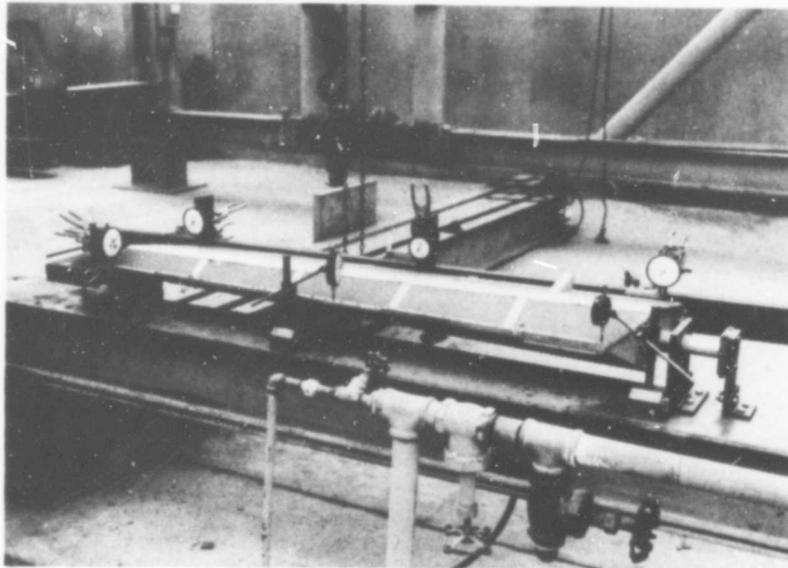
View Showing Rudder Accommodating Jig and Deflection Measurement Setup. Note Torque Tube Tie In.
